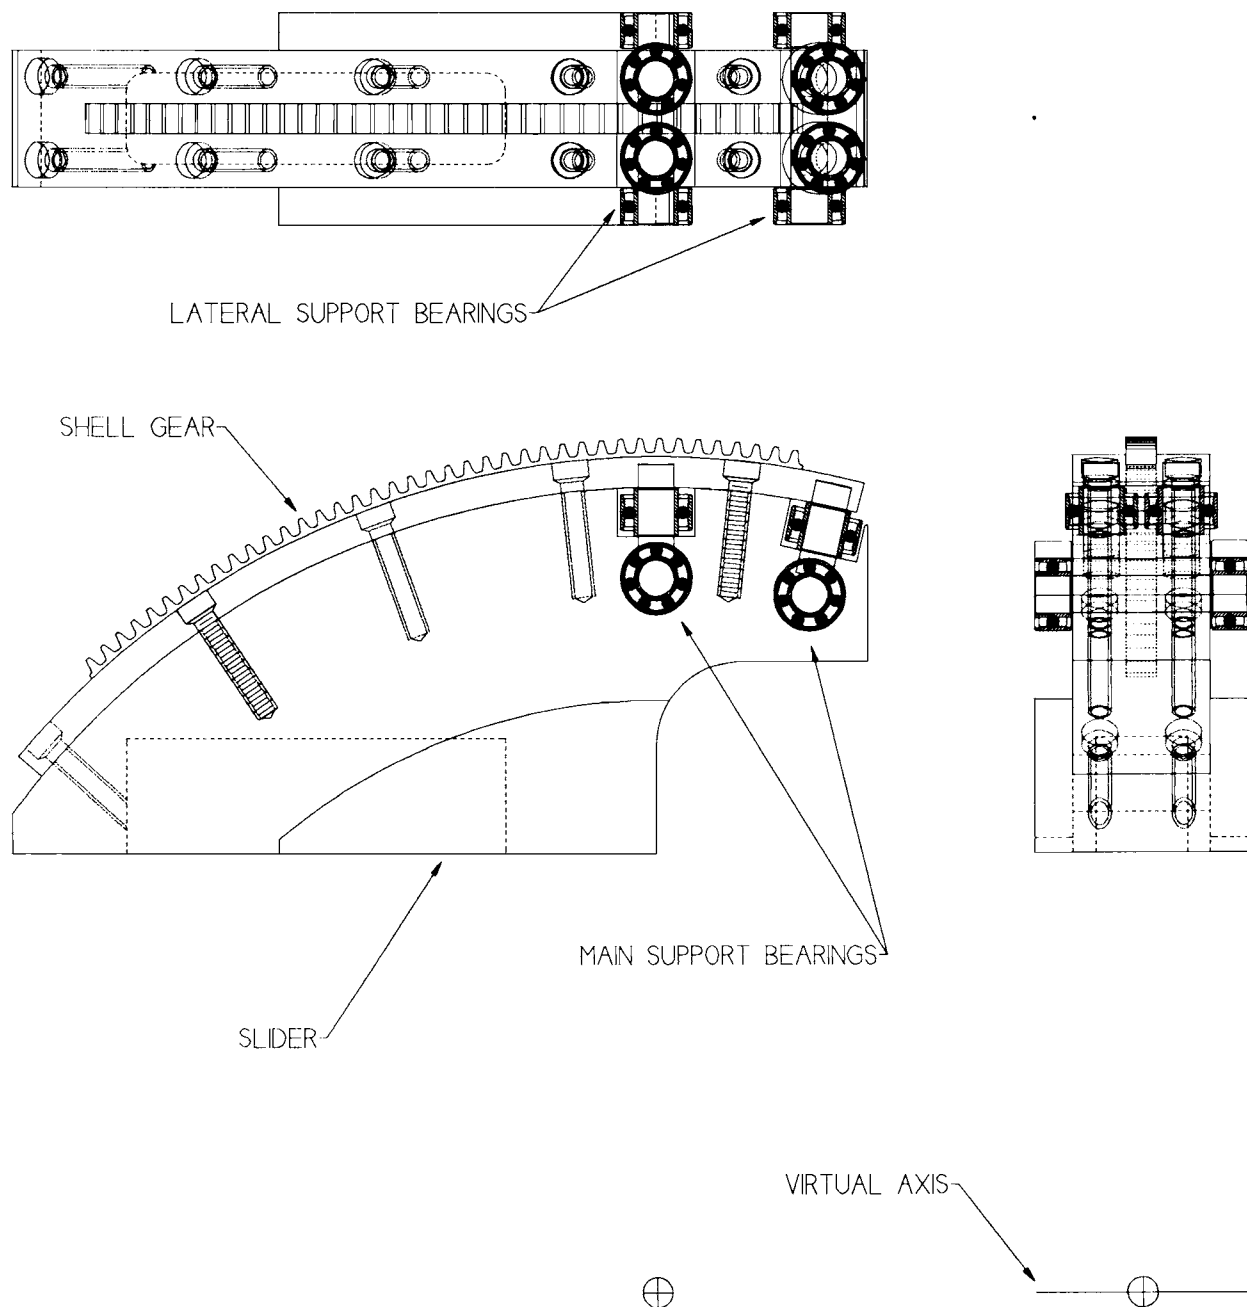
Detailed view of slider support bearing used in Phase-II joint design. A single (rather than dual pair) of lateral support bearing was placed above the main bearing and within the slider. (Dwg. GLOVE007.GCD)
